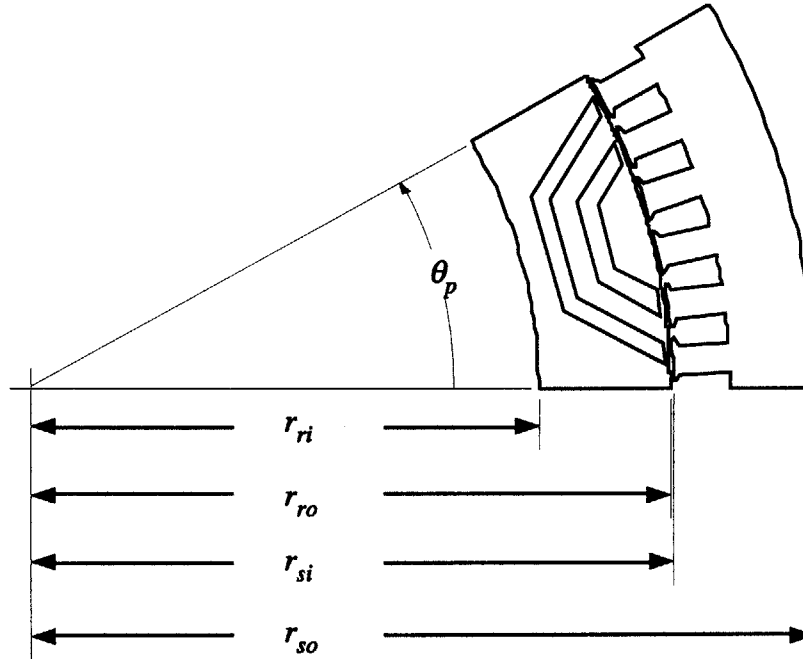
IPM machine pole cross-section with main radial dimensions.
